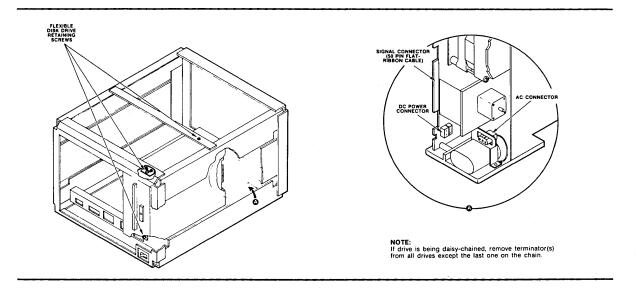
Flexible Disk Drive Retaining Screw Locations
